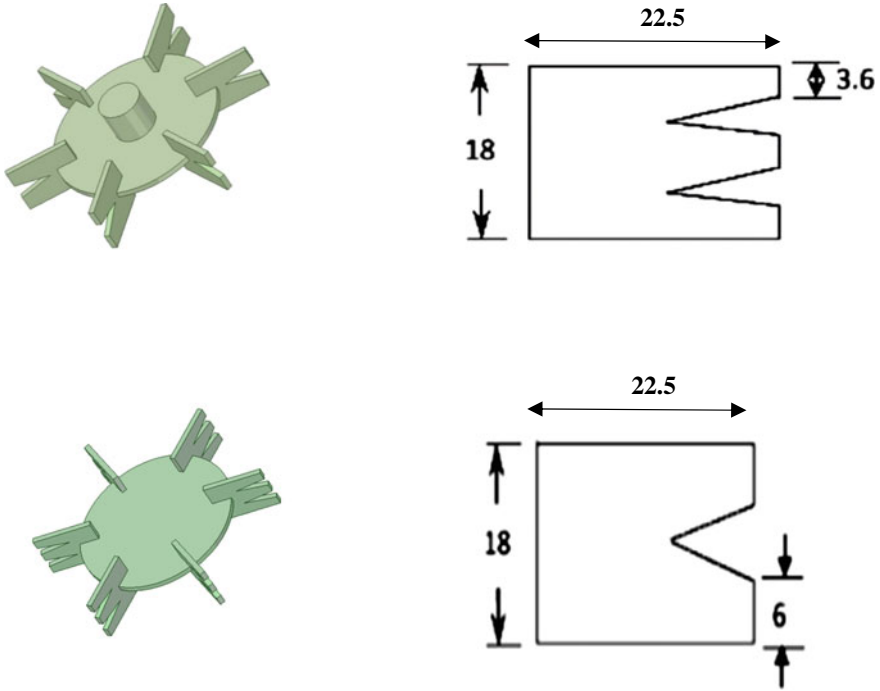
V—cut turbine and W—cut turbine image with dimensions
